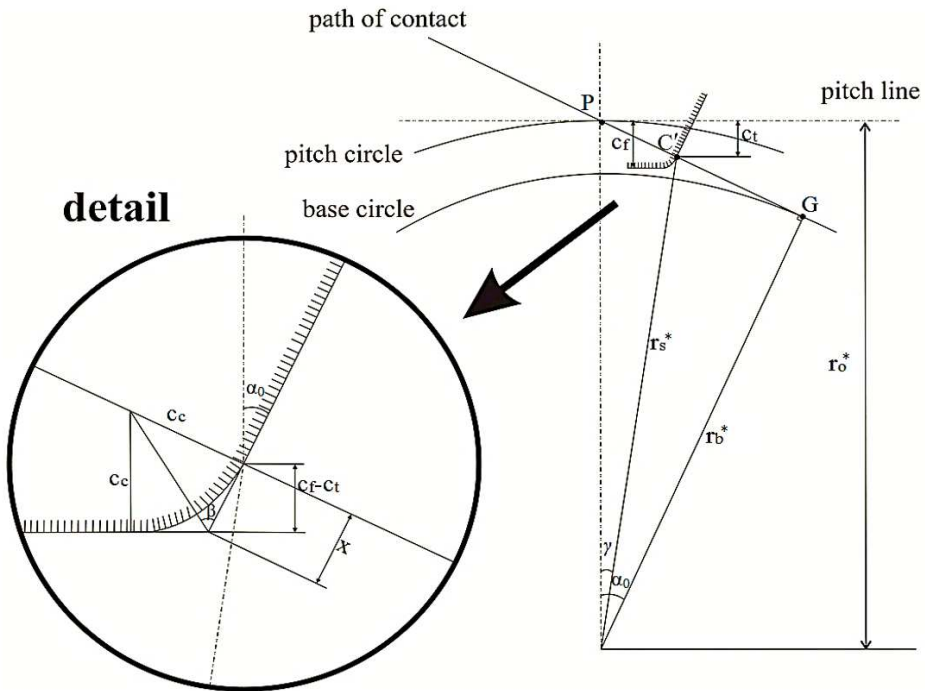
Geometry of gear cutting at the tooth fillet [44]
